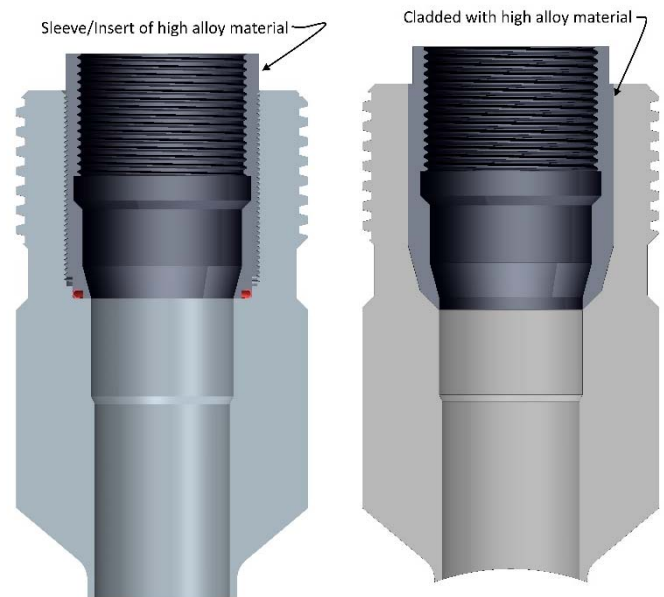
Sleeved vs. Cladded Access Fitting for extremely corrosive services
